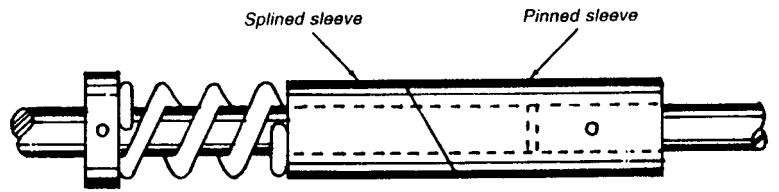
A cylinder cut at an angle forms a torque limiter. A spring clamps the opposing-angled cylinder faces together, and they separate from angular alignment under overload conditions. The spring tension sets the load limit.
